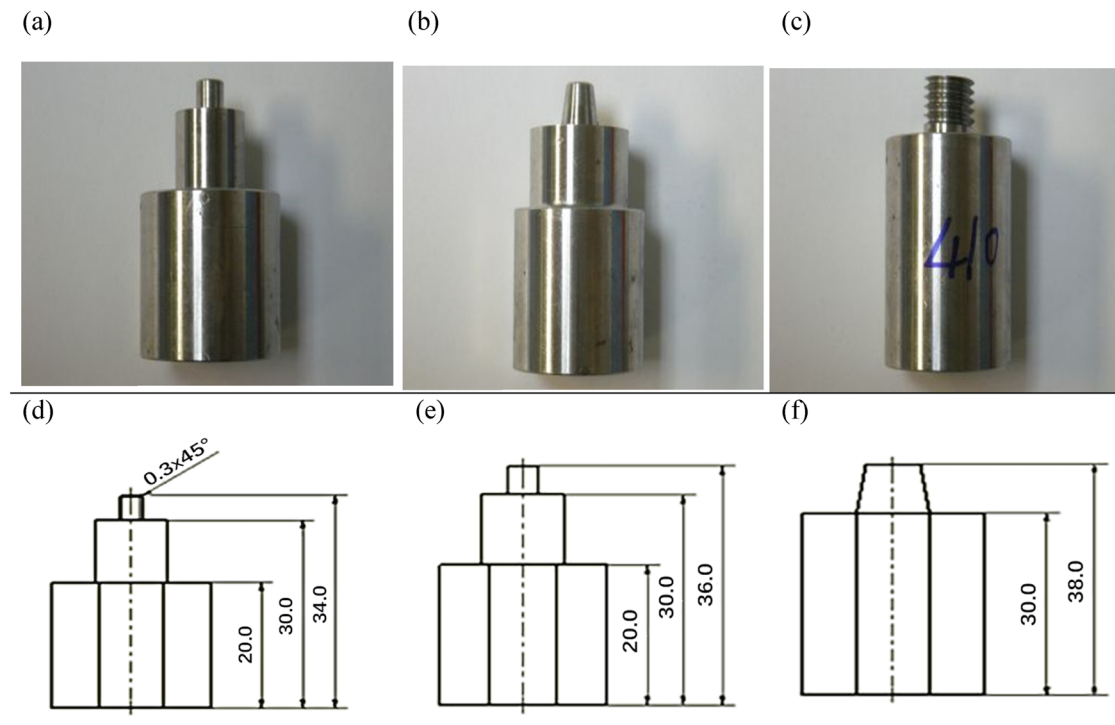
Drawing the configuration of tool pins and shoulders in various geometries made of stainless steel: (a and c) straight cylindrical type, (b and e) tapered type, and (c and f) cylindrical threaded type with geometry and dimension.
